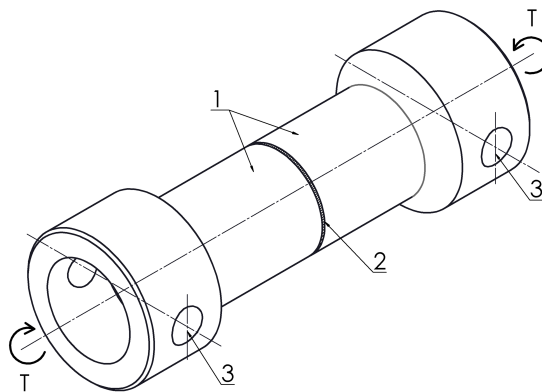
Specimen design; 1-adherent (hollow cylinders), 2- bond line, 3-holes for fastening bolts (according to EN 14869-1)
